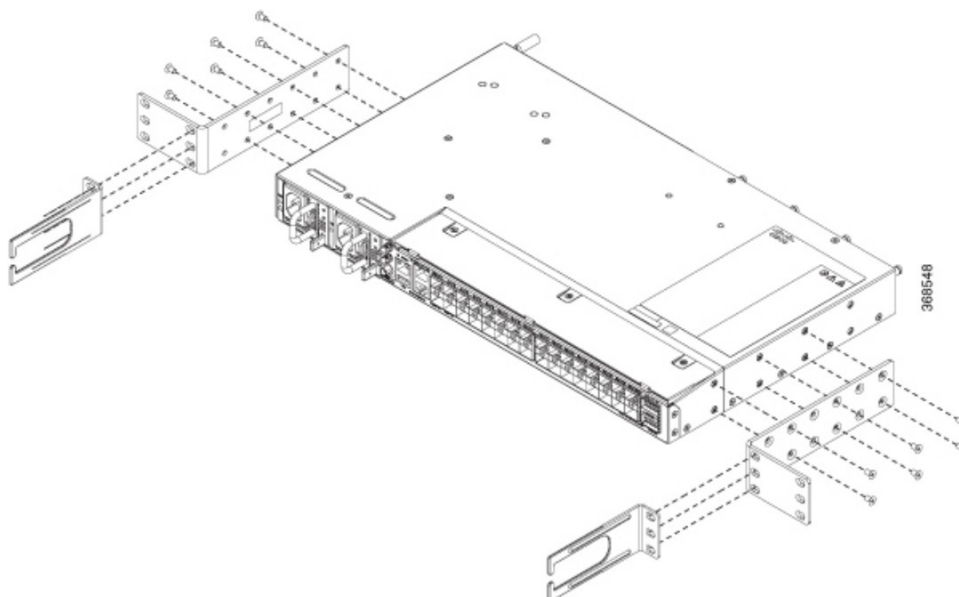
Installing Cable Management and 23-inch Rack-Mount Brackets in the Middle
